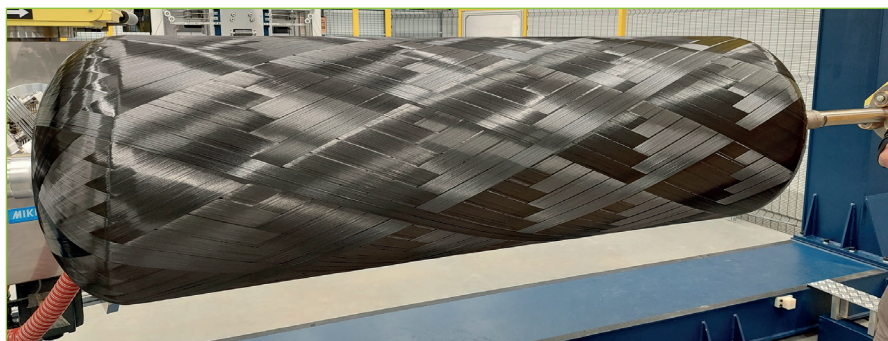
Towpreg filament winding machine at Cryomotive, Germany
